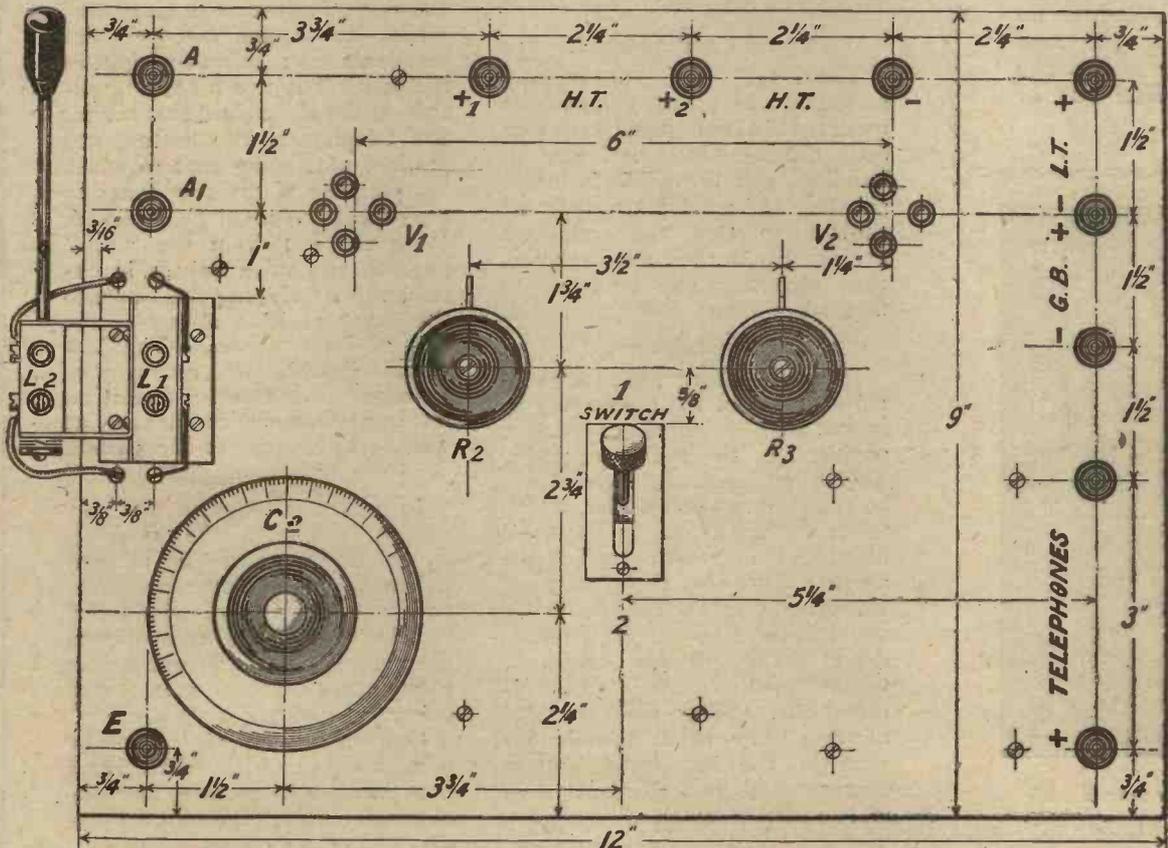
Drilling dimensions and all details relating to the layout of the panel may be obtained from this illustration.
